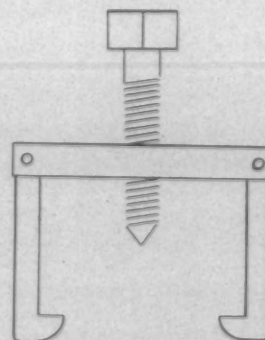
Pullers to fit all loom gears and wheels can be made in the mill shop.
